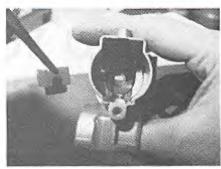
shows the bolt retractor cam removed from the cylinder, exposing the rear of the lock plug. The eam is "keyed" as you can see, and can only be installed over the rear of the plug in one way. Take note also, that the "key alarm switch" has not been removed. It is not necessary, and not recommended to remove this switch. The "one way" push-on grip fasteners are very fragile. I have had very little success removing them without damage. If you break one, screw a 4-40 nut
